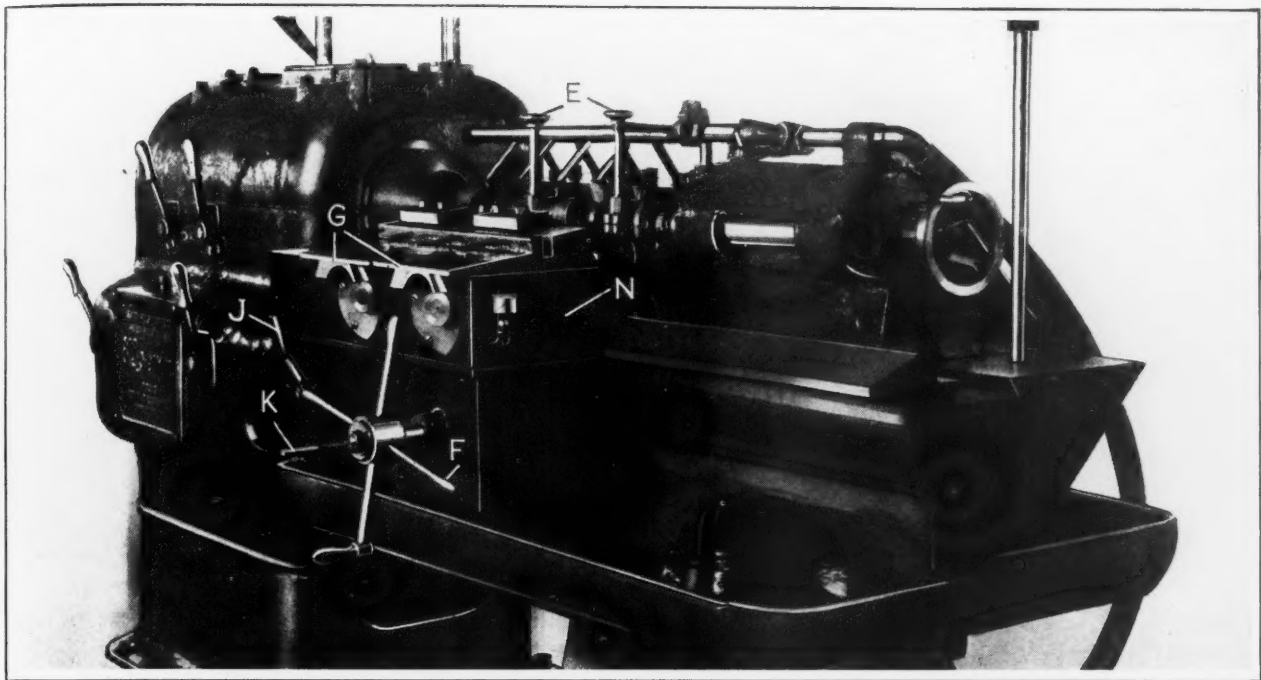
Equipment Designed for Beveling the Outer Ends of the Cheeks of Automobile Crankshafts
